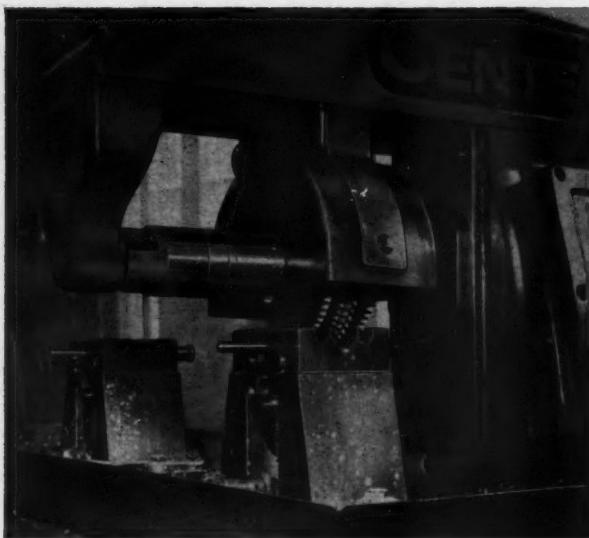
At this pendulum milling set-up on another Automil machine, a pair of spindle components is produced from a single blank at each cycle
